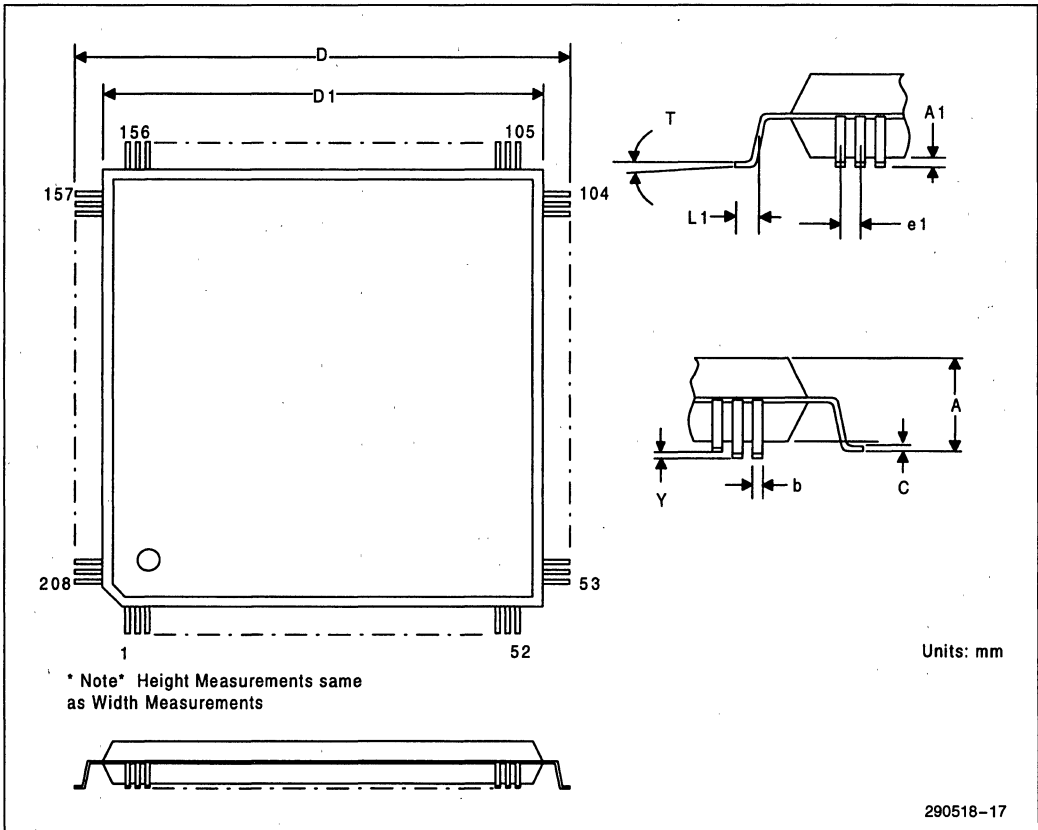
208 Pin Quad Flat Pack (QFP) Dimensions
